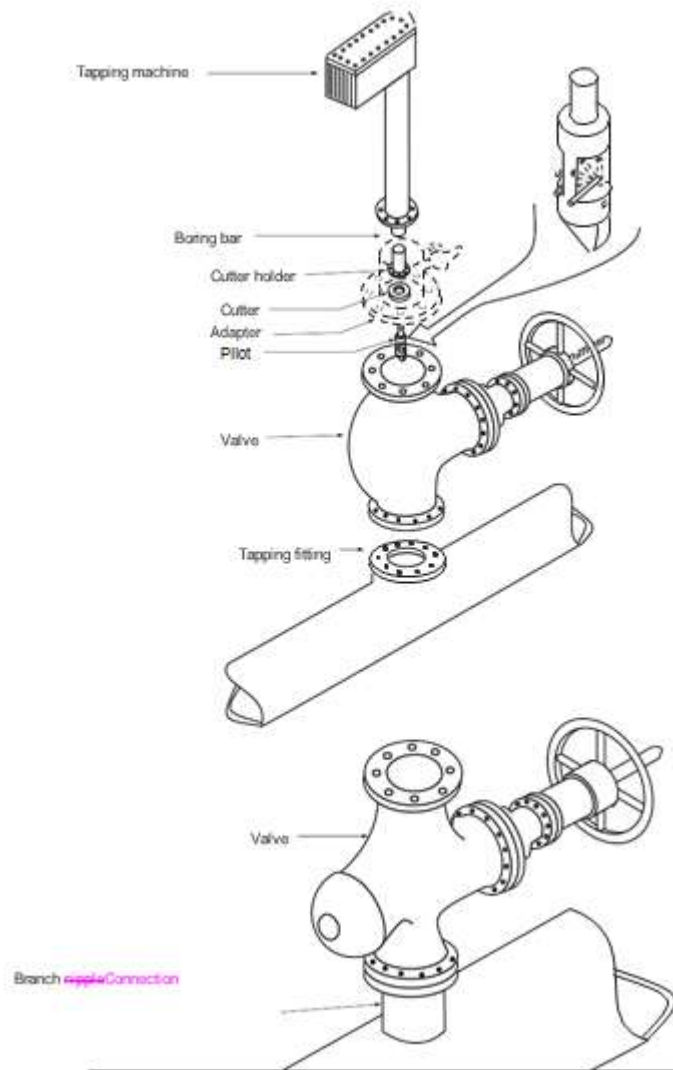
Hot Tapping Machine and Typical Hot Tap Connection
